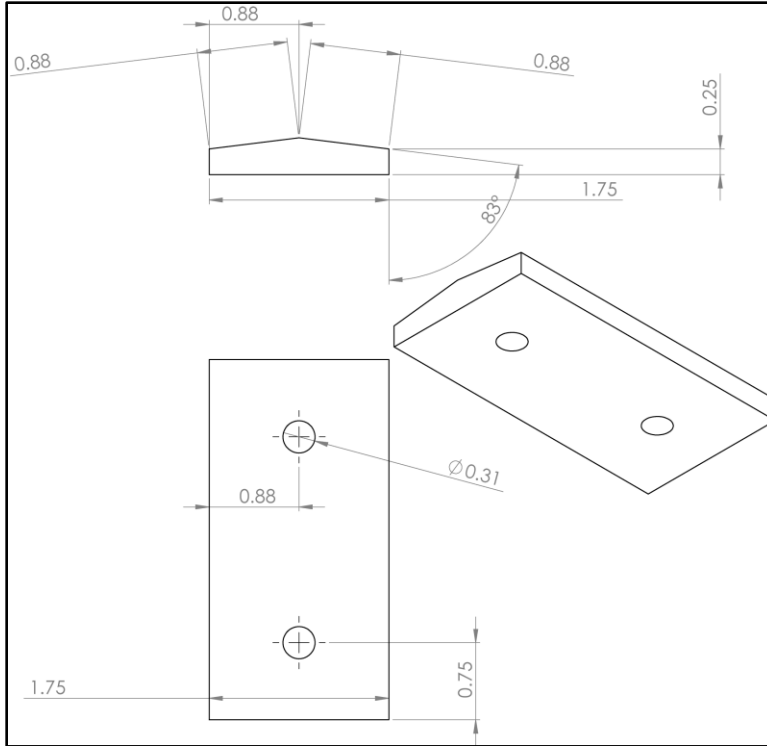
Diffuser Second Throat Sharp Blocks, Drawing
